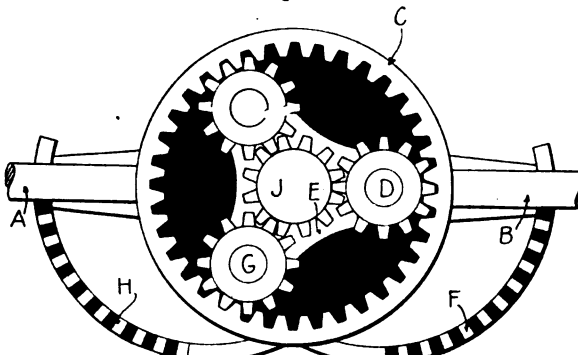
Ford Type of Planetary Steering Gear Assembly.
